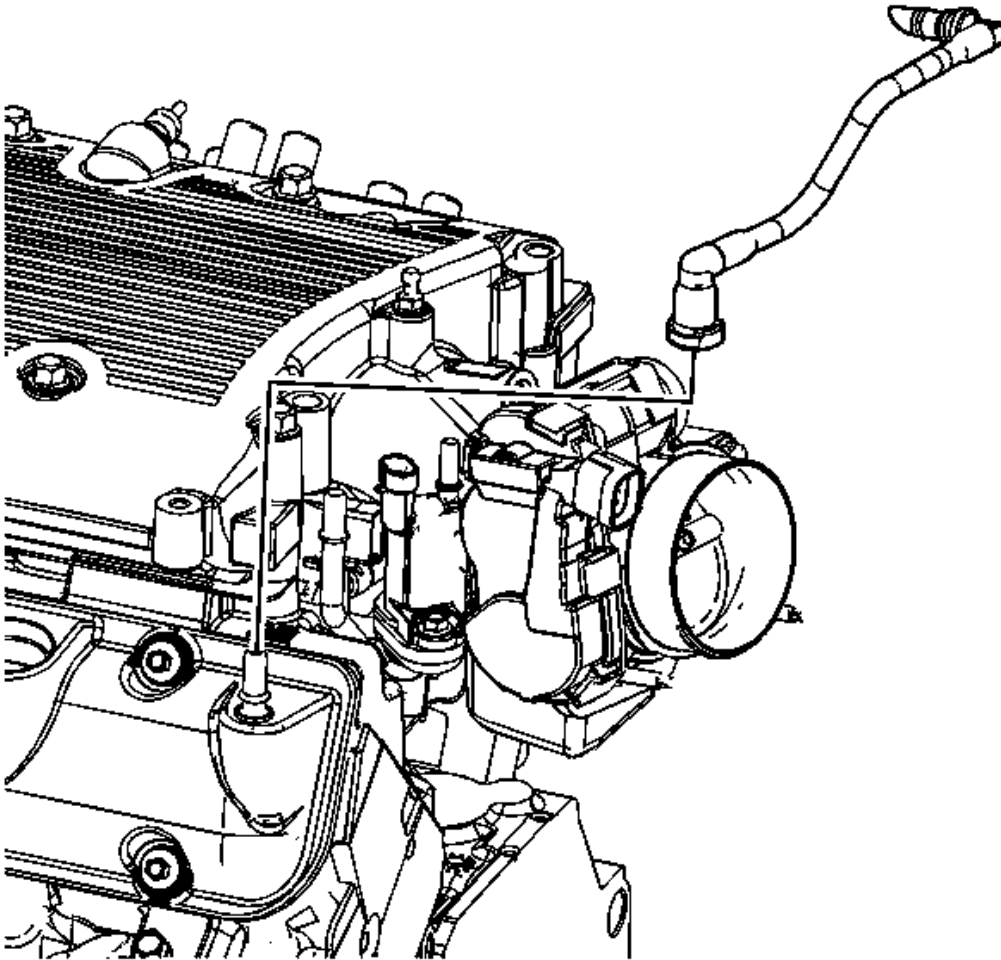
Positive Crankcase Ventilation (PCV) Tube
